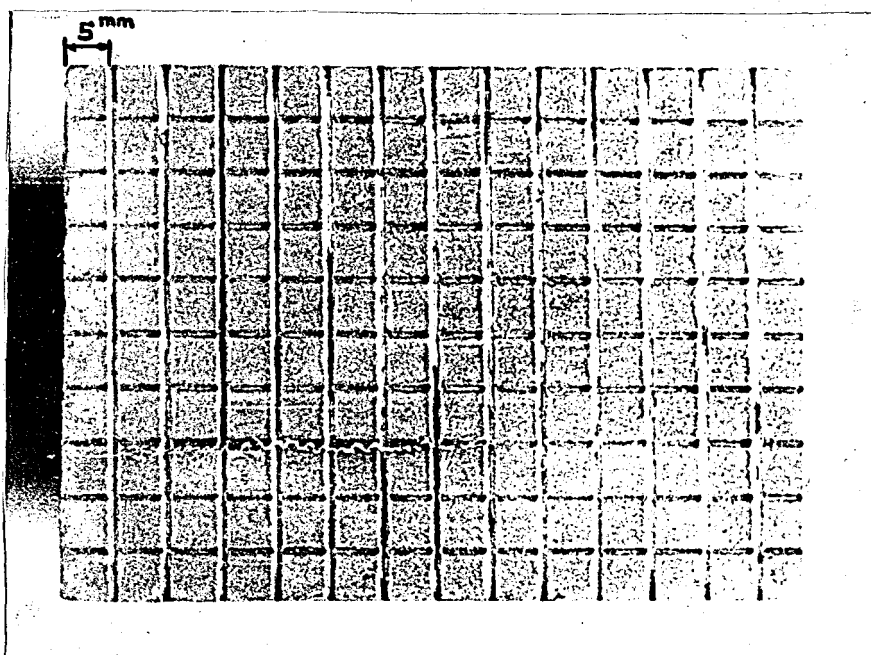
Sectioned Billet Which is Machined Square Grid Network Spaced 5.0 millimeters Apart and a Line Depth of 0.2 millimeters.
